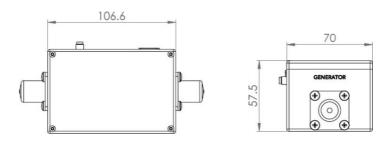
Dimensional drawings of the standard Octiv Mono (model 02-0231-01) with Quick Change RF connector interface. All dimensions are in mm. Contact Impedans for dimensional drawings of other models.
